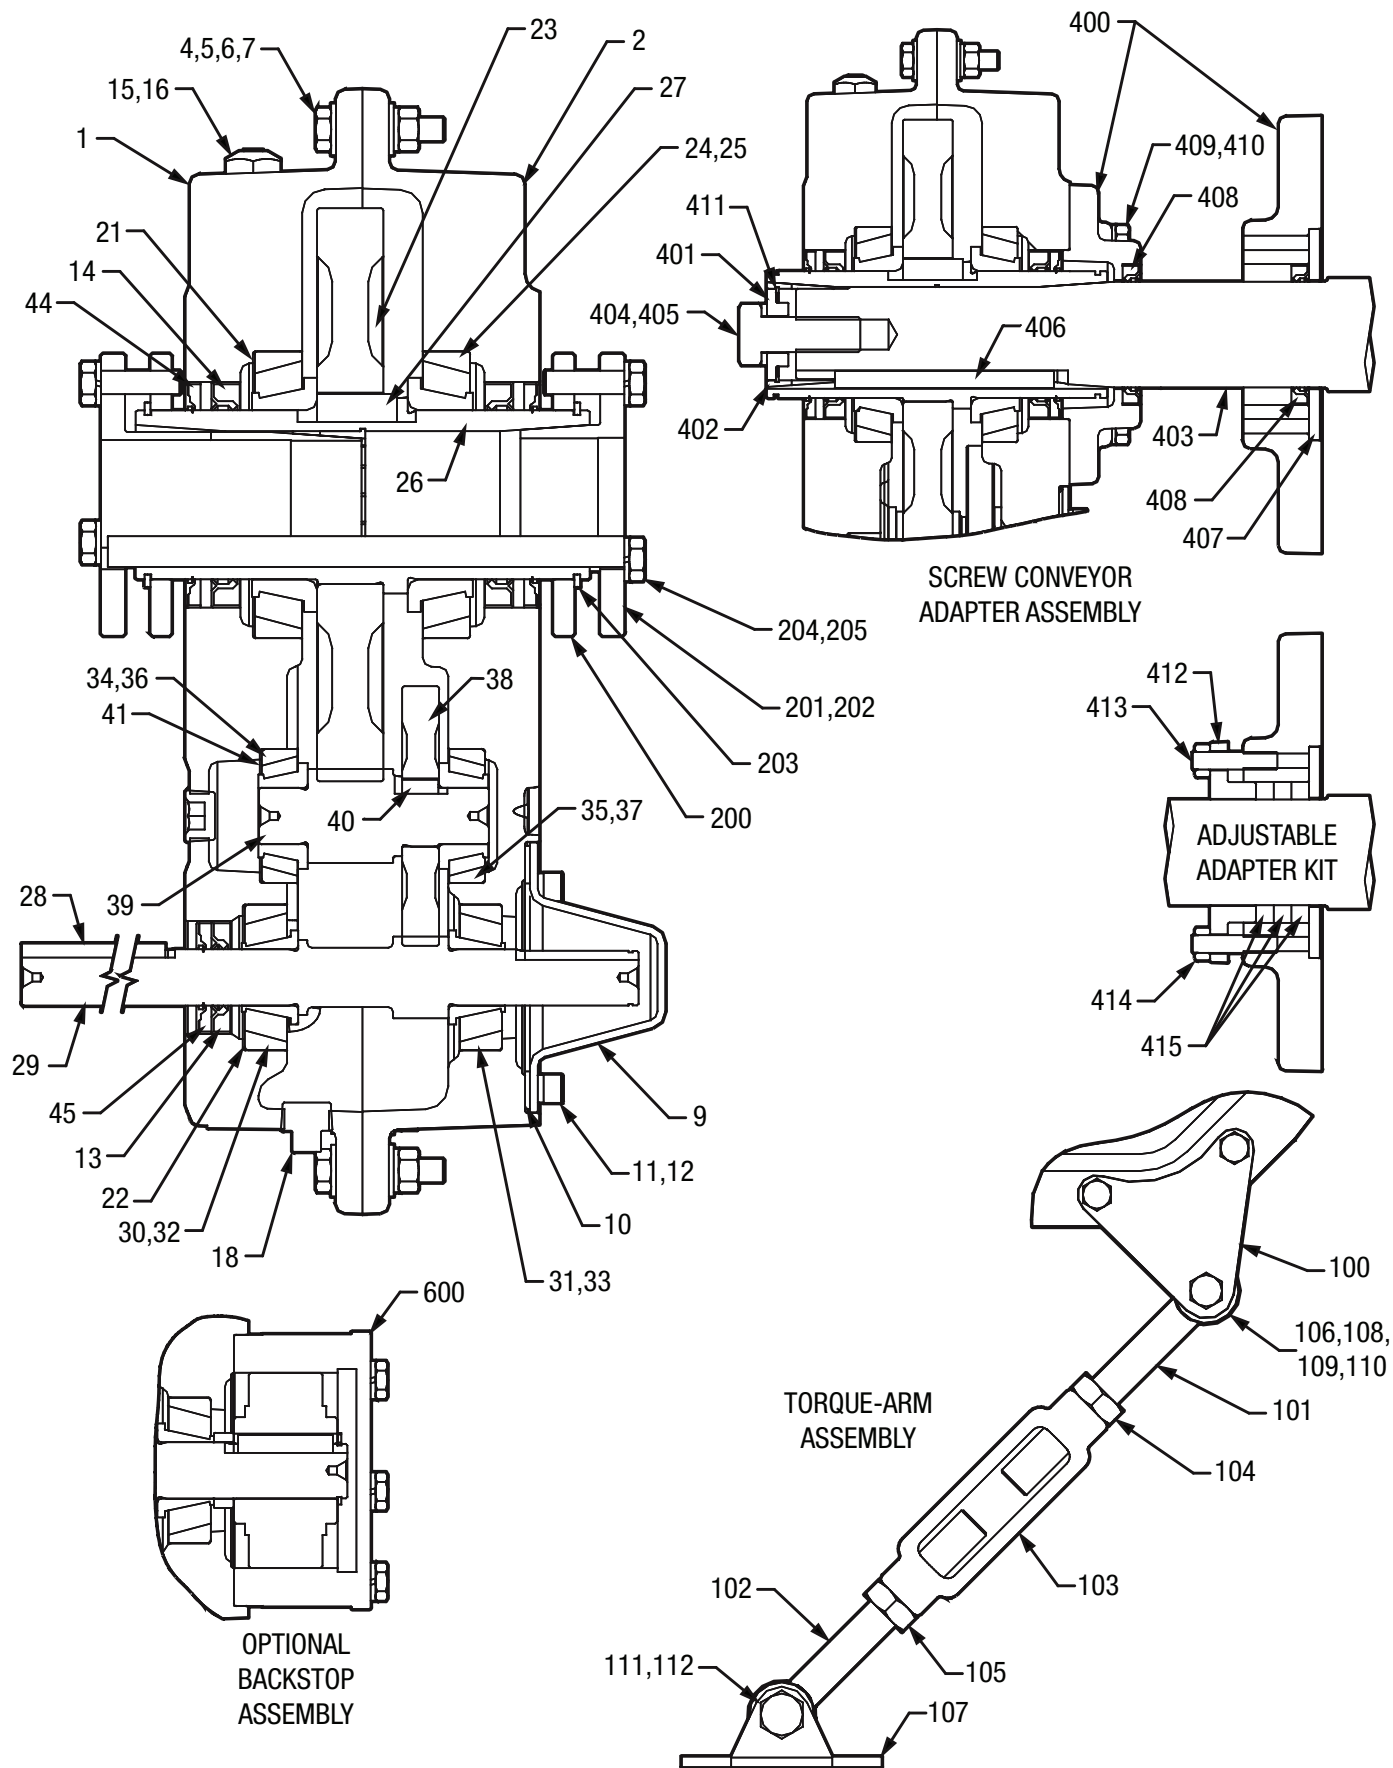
Parts for TA0107L through TA12608H Taper Bushed Double Reduction Reducers
